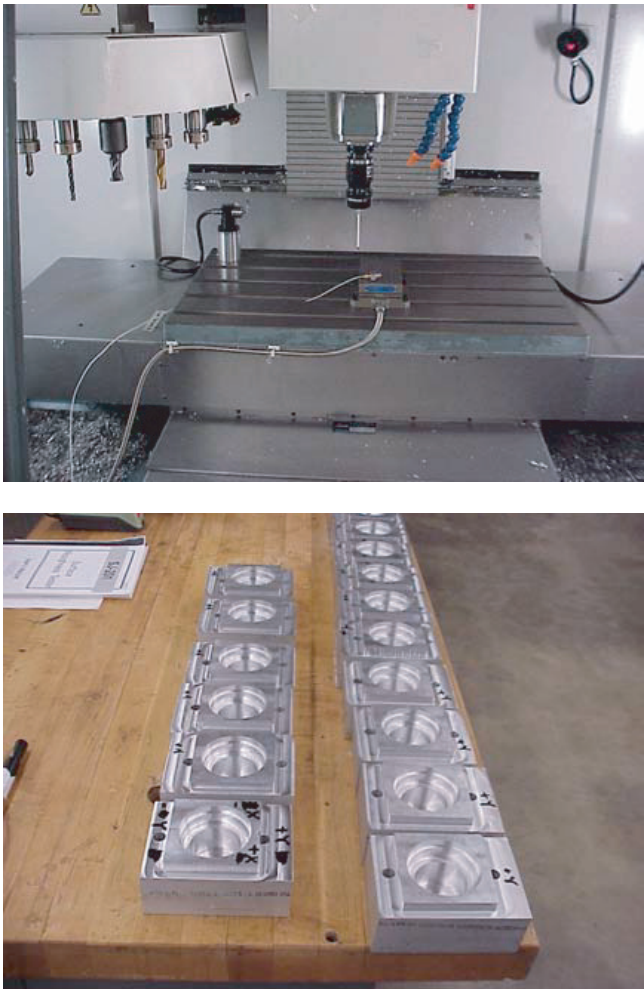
A spindle mounted touch probe in the 750 CNC VMC and the finished aluminum blocks.
